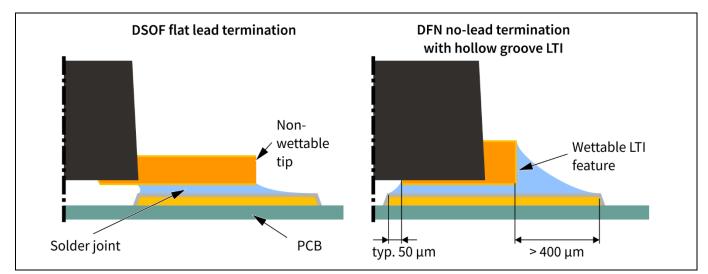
Schematic depictions of the DSOF flat lead solder joint (left) and the DFN no-lead solder joint with hollow groove LTI (right). The PCB pads for flat leads are mainly extended to their sidewall, whereas those for the no-lead terminations with hollow groove LTI are narrower and extended to the tip. The images are not to scale.
